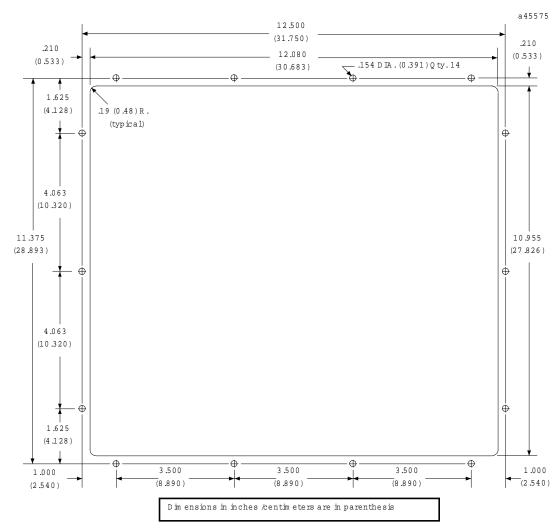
Mounting Hole Dimensions, Touch Display Unit
